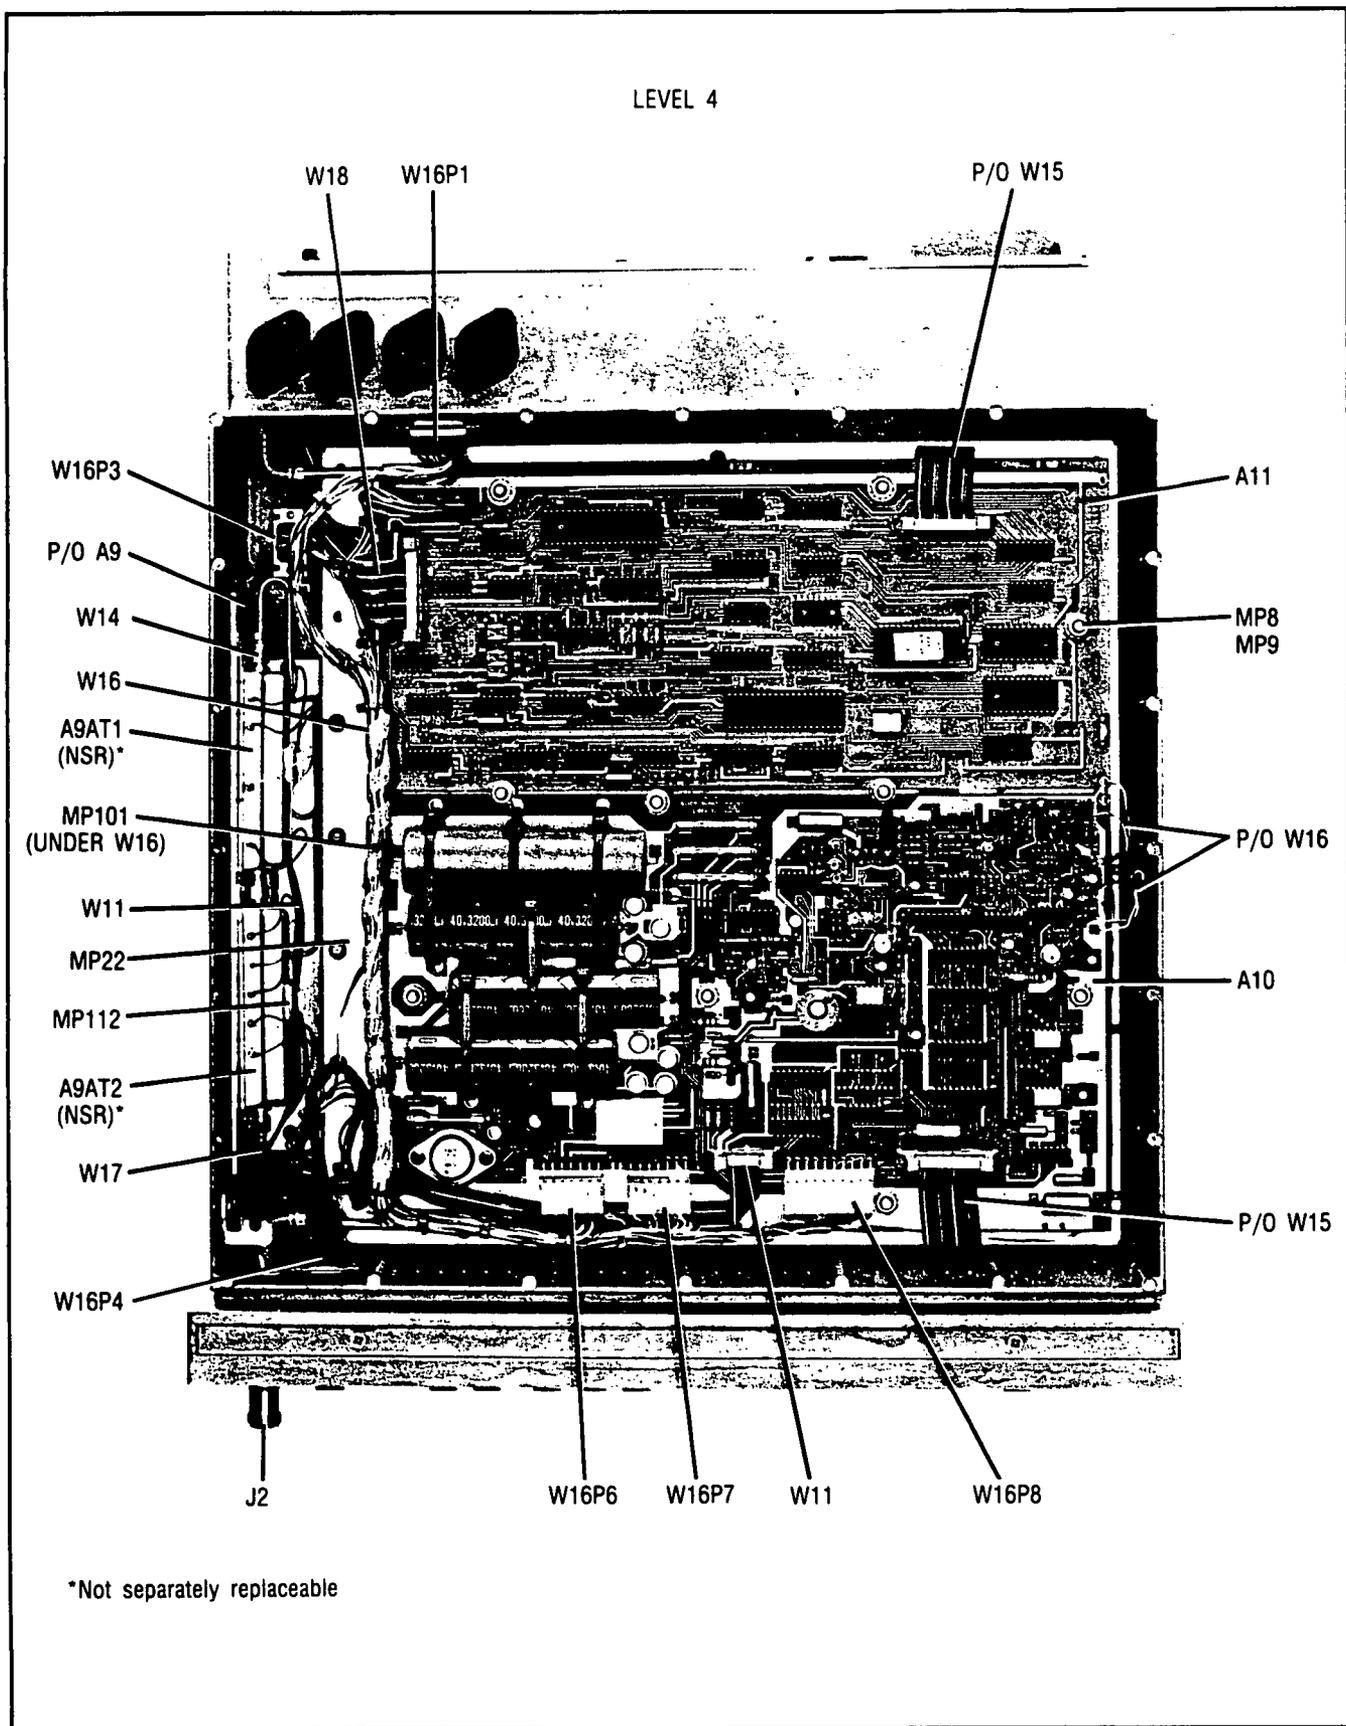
(2511A and above). Bottom Internal View; Bottom Cover Removed
